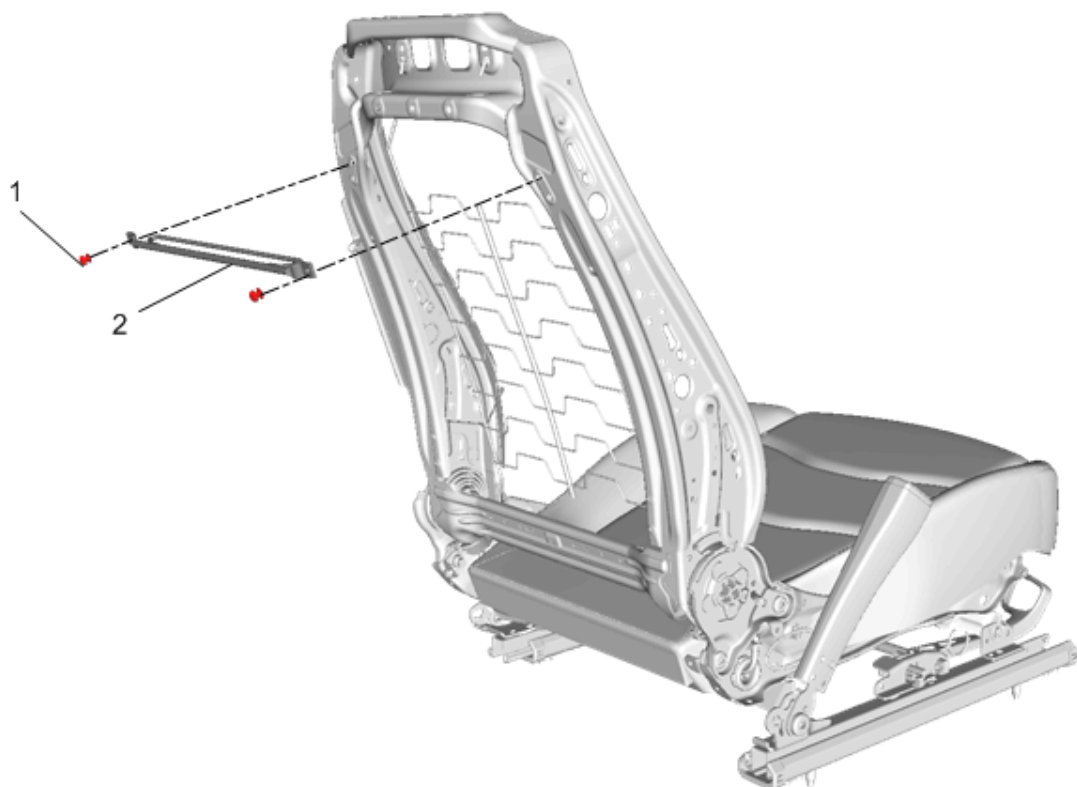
Driver or Passenger Seat Back Cushion Pad Wire
